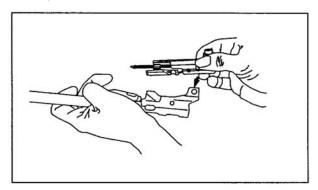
Attachment of the slide assembly to the piston
